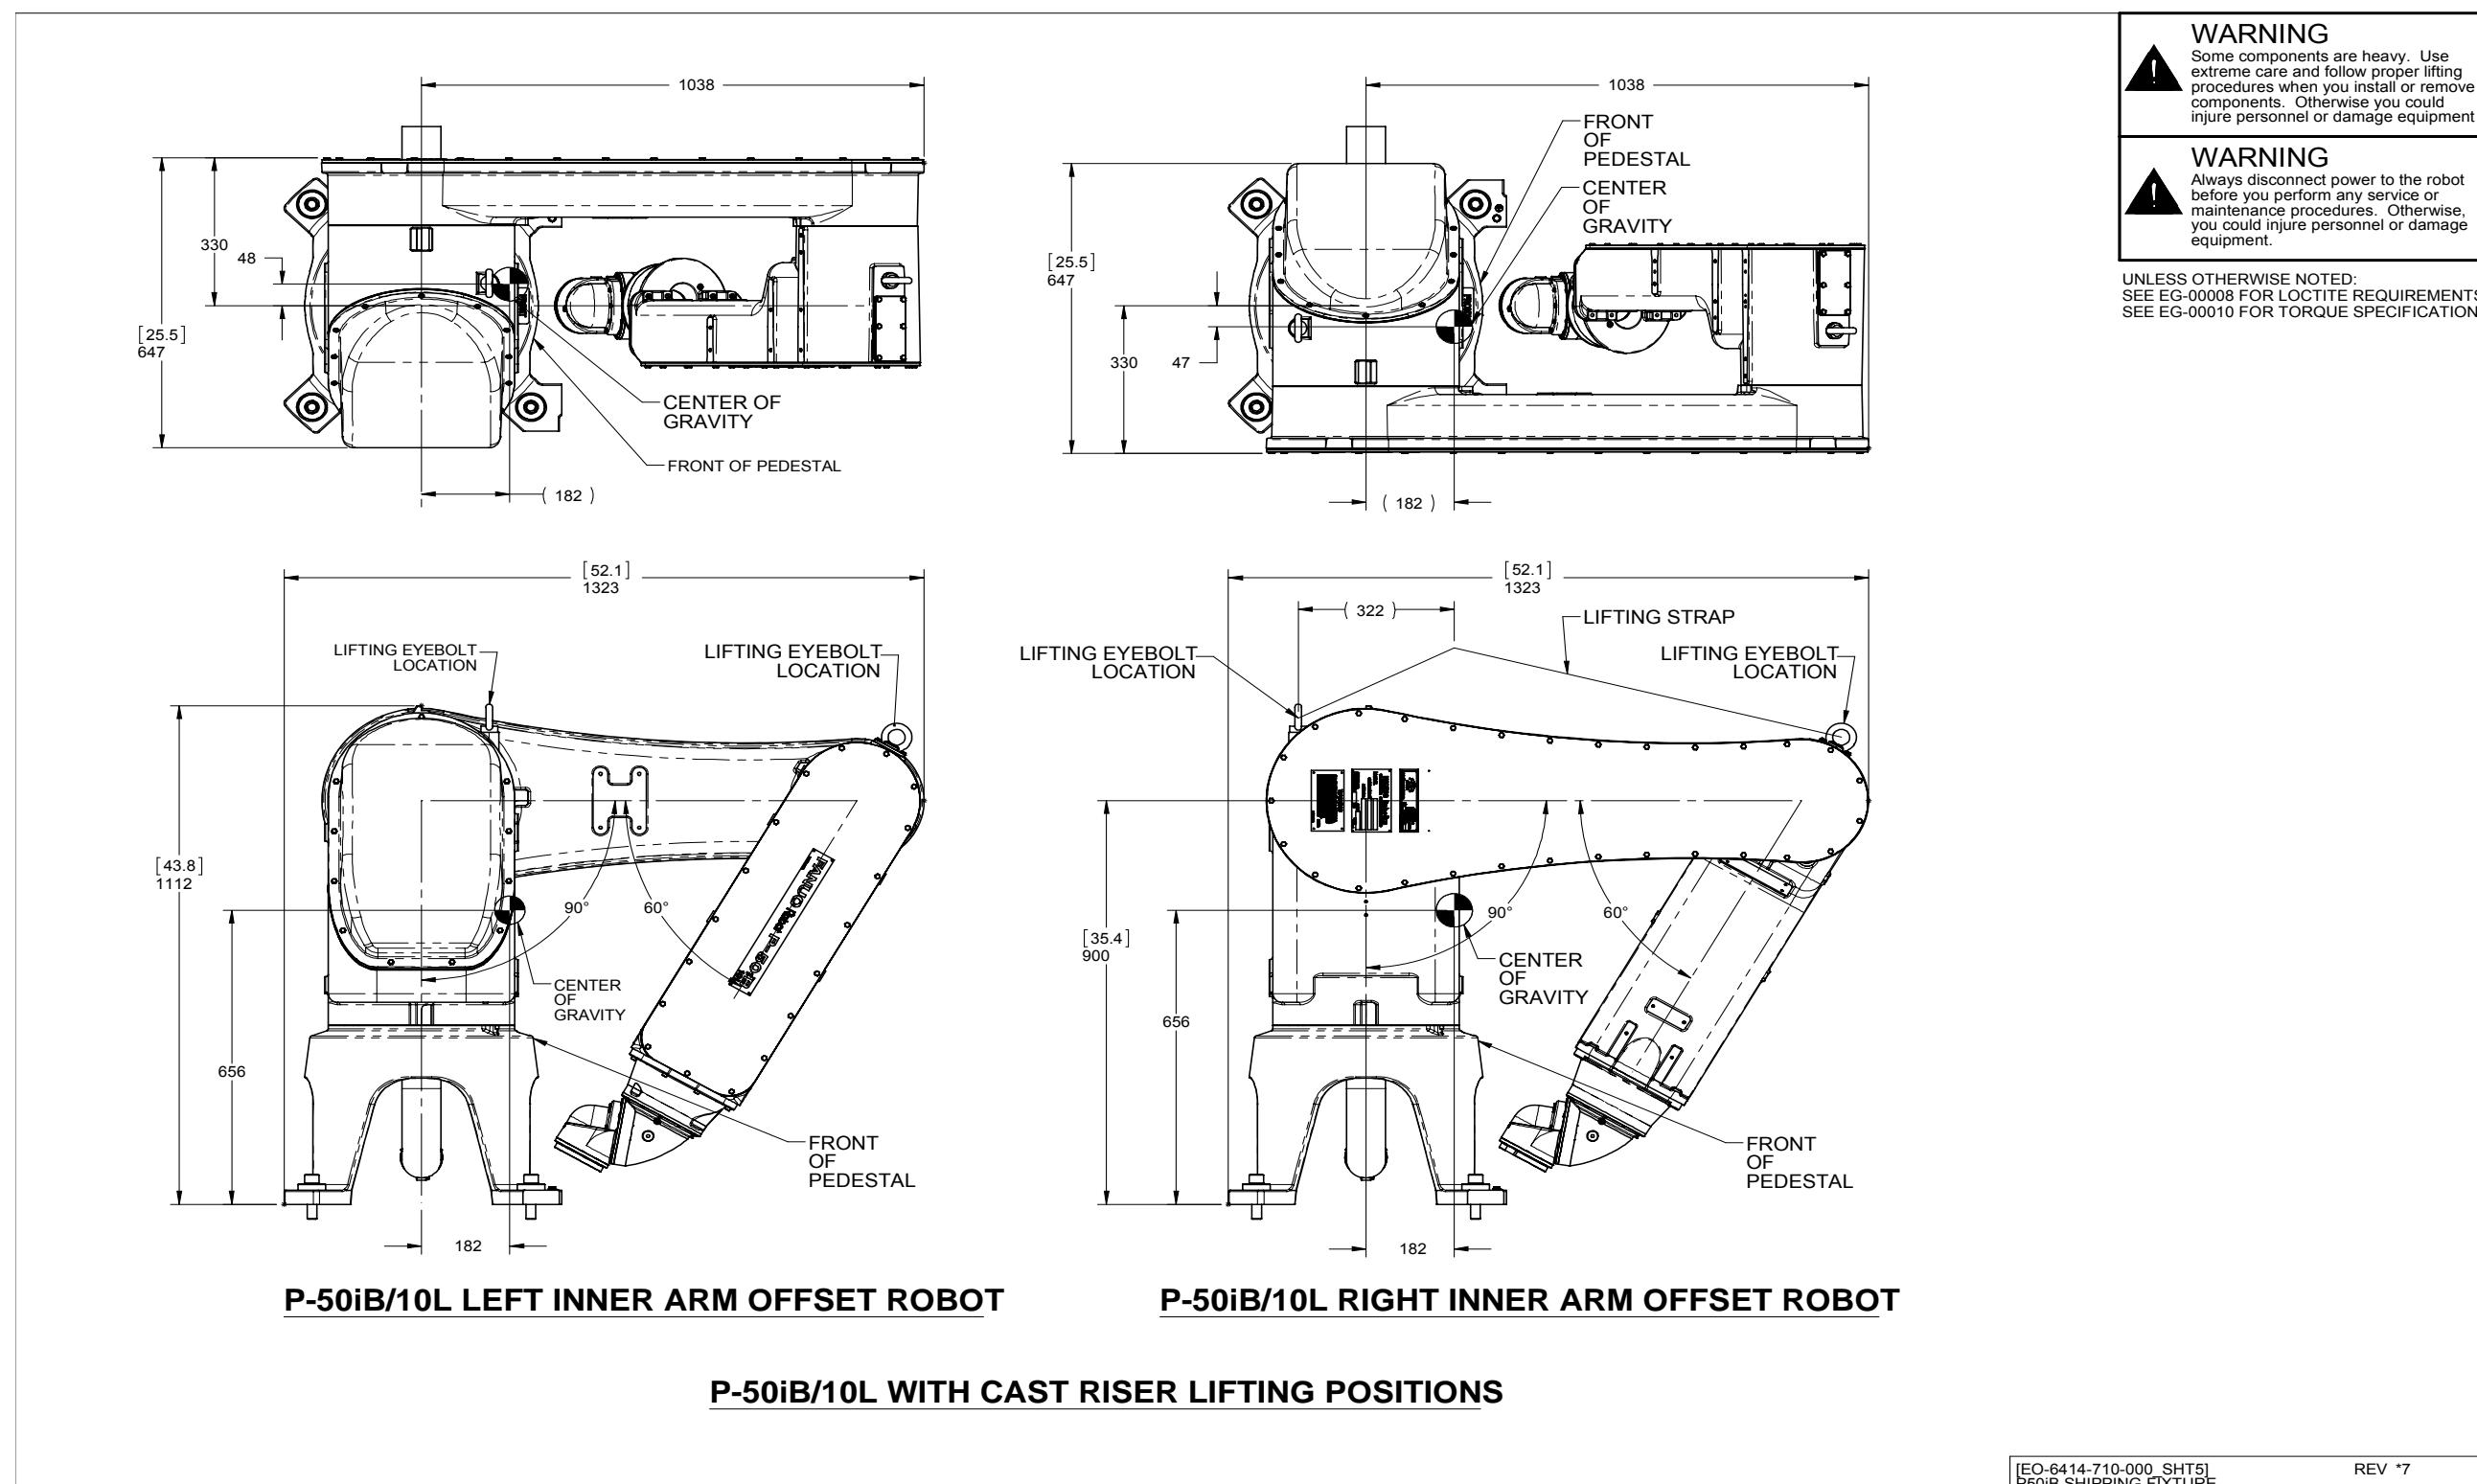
EO-6414-710-000 SHT5, P50iB SHIPPING FIXTURE
